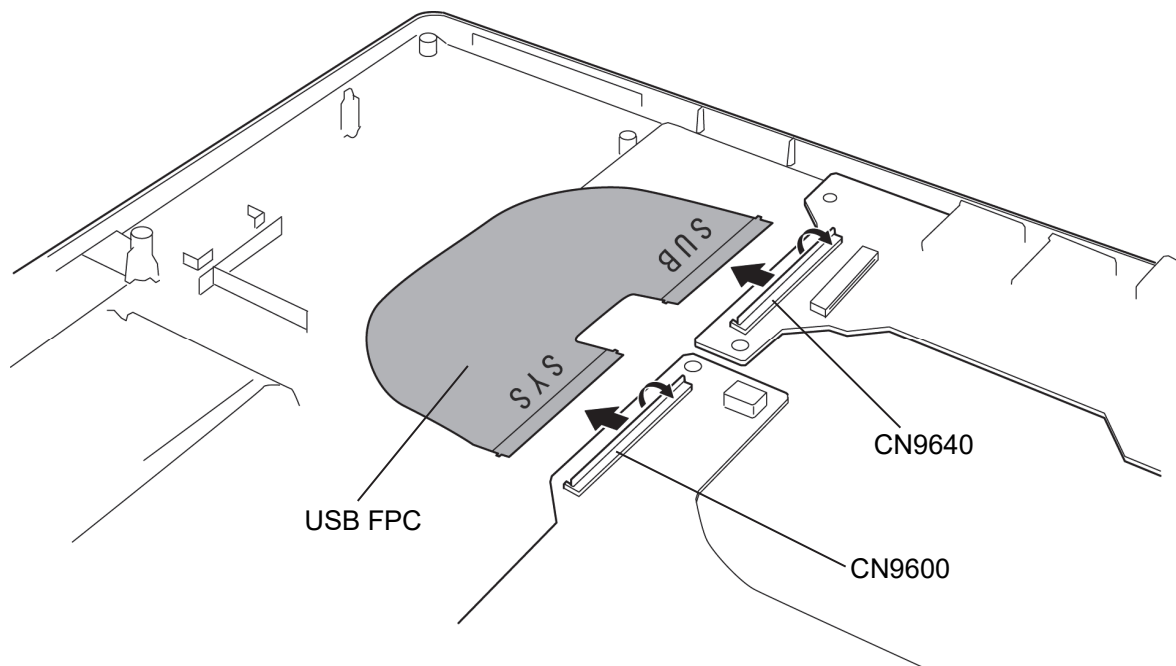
Removing the USB BOARD/LTE BOARD (1)
